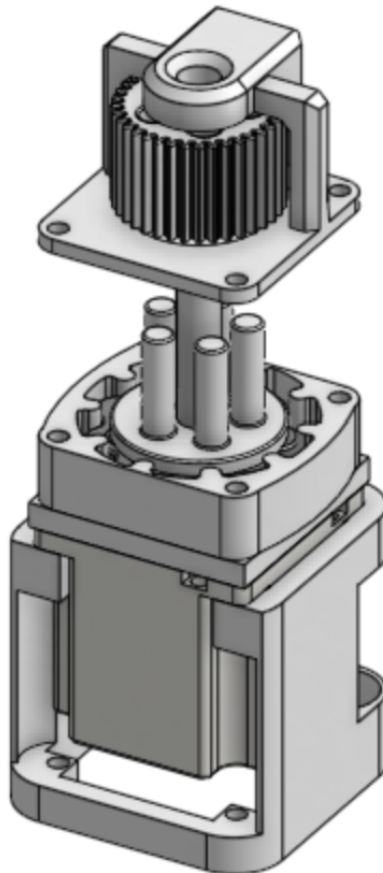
Exploded view of the carousel drive gear over the assembled gearbox.
